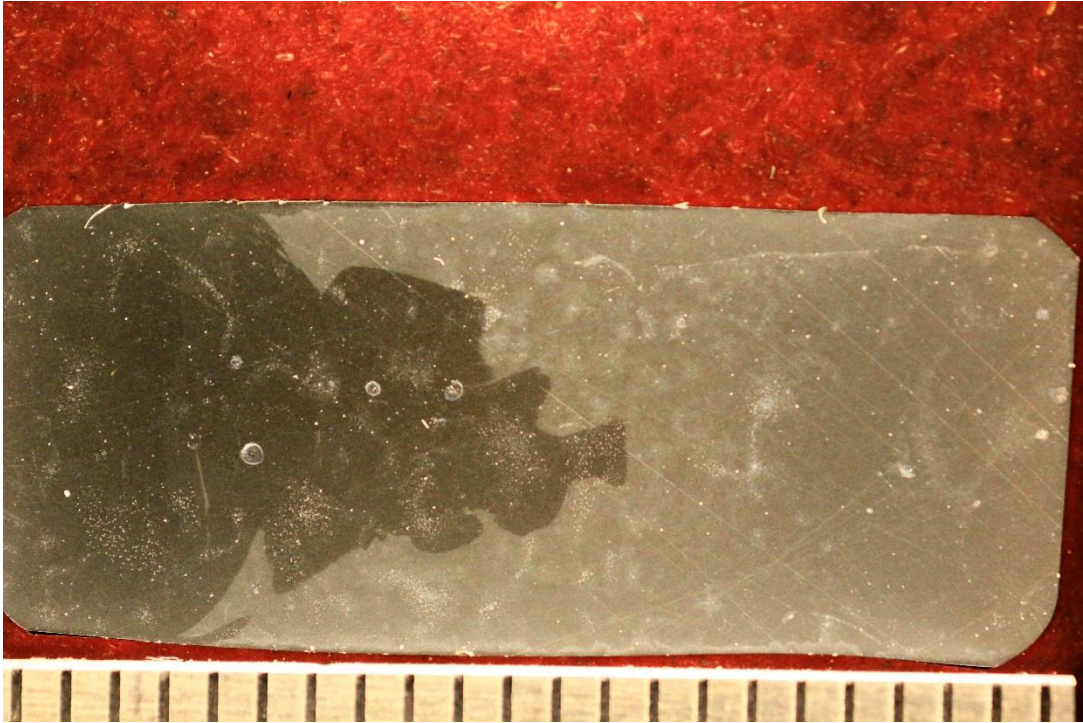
Macrograph of Weld 1 Sample 1
